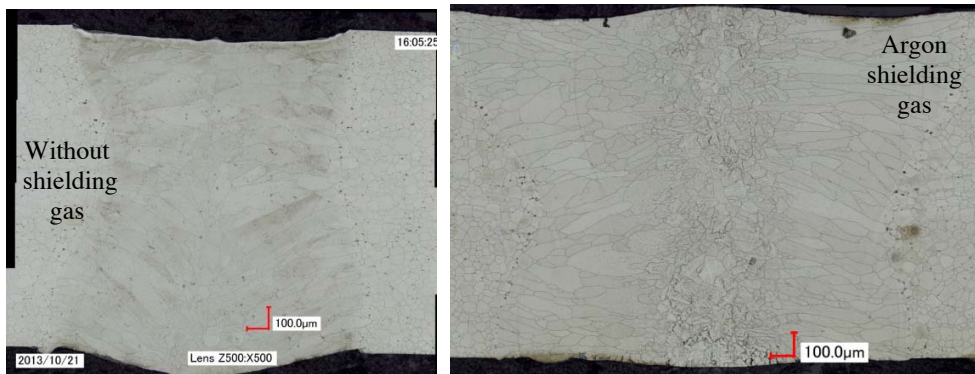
The cross section of the 90 J/mm welds without shielding gas and with argon shielding gas
